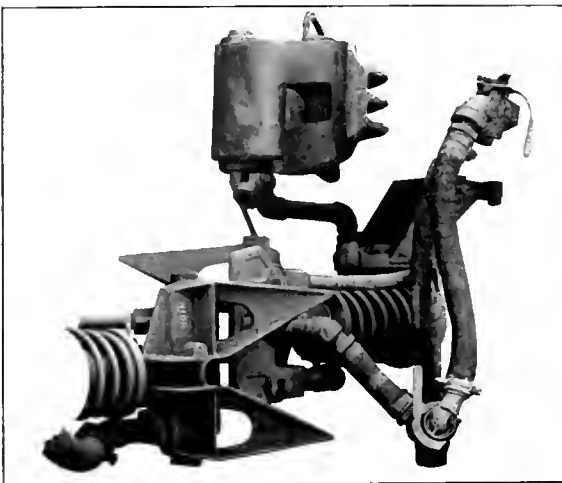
Coupling with One Connector $4\frac{1}{2}$ in. Low and 3 in. Off Center
